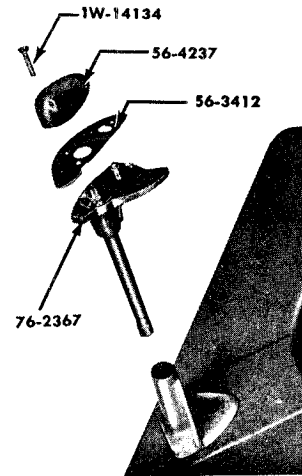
SEPARATOR-POST-ASSEMBLY REMOVAL
